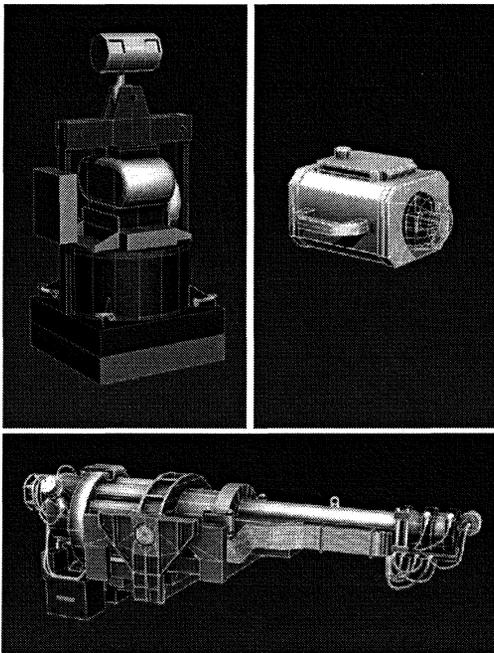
3D asset examples; MUND, NGSS camera, and PWR fuel loading machine
